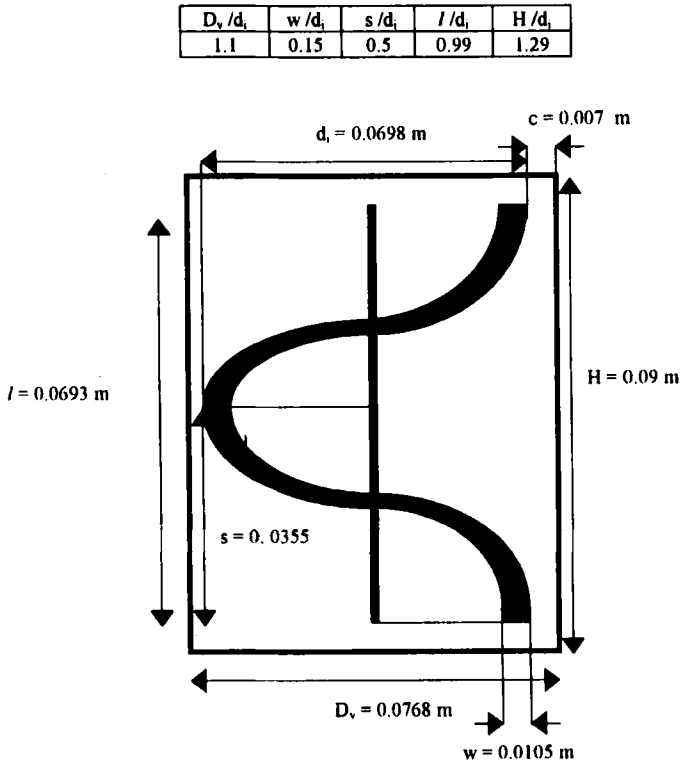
PRINCIPAL DIMENSIONS OF ACRYLIC VESSEL AND HELICAL RIBBON IMPELLER
